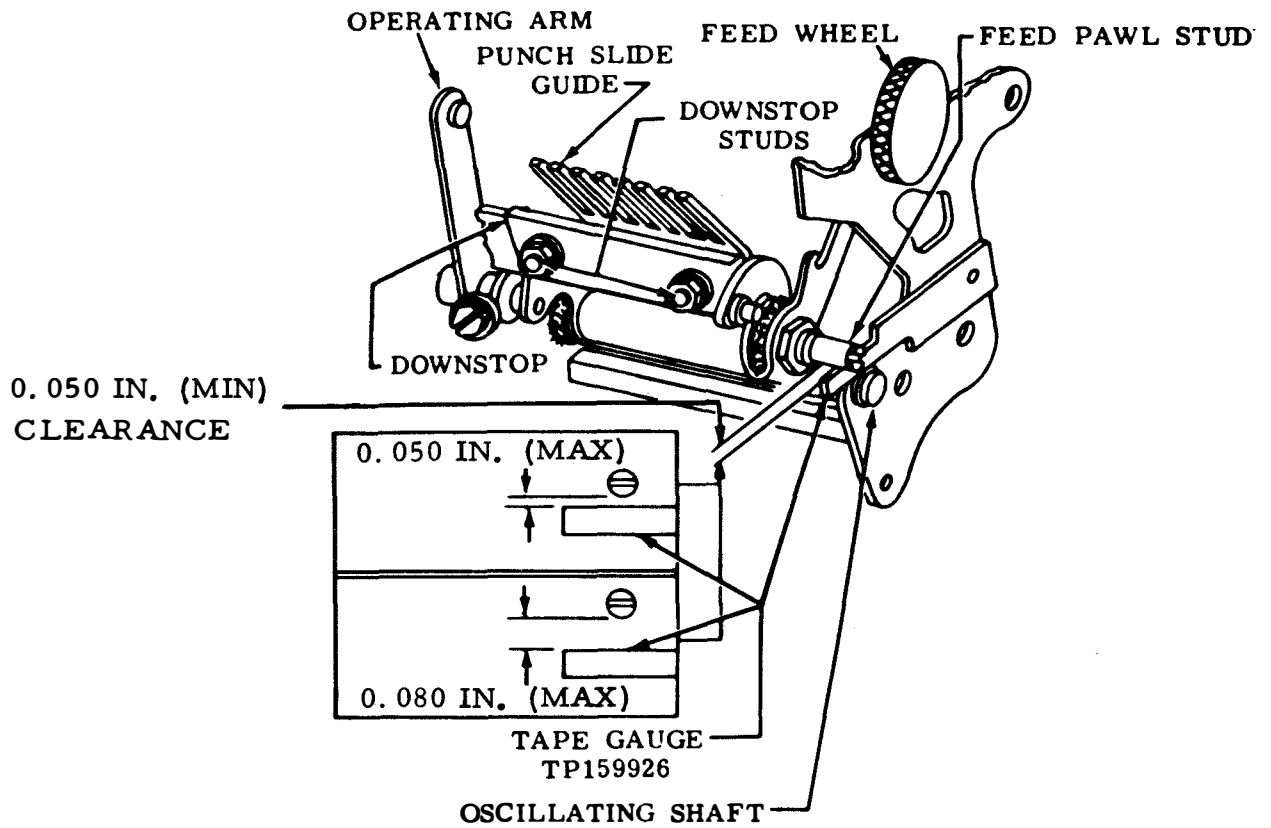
Punch Pin Penetration for Fully Perforated Tape - Left Side View
